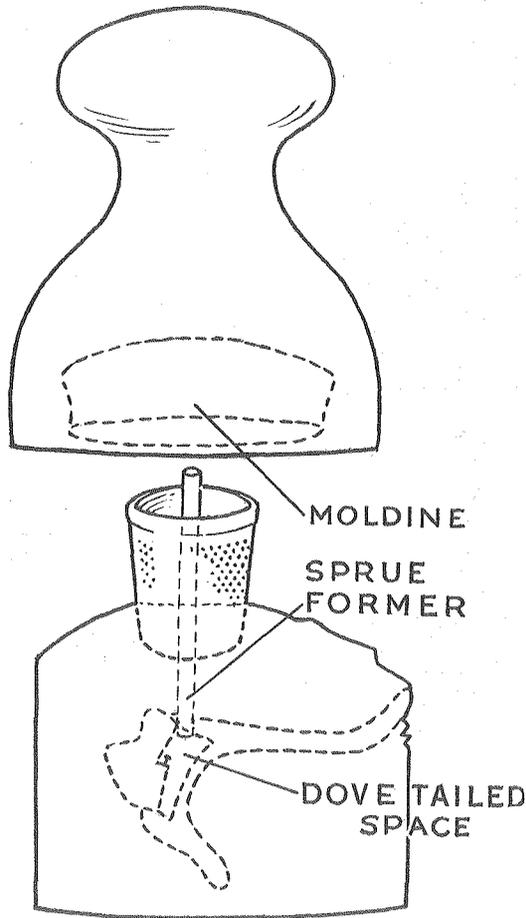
Diagrammatic View of the Invested Case, Thimble in Position, and Moldine Carrier. Sprue Former Not Yet Removed
